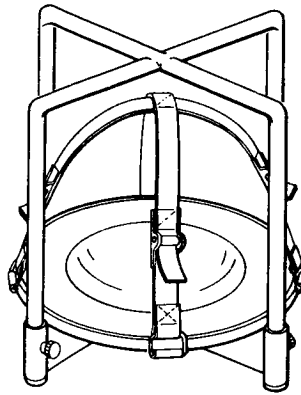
Universal Handling Fixture, Hydrazine/Helium Tank
